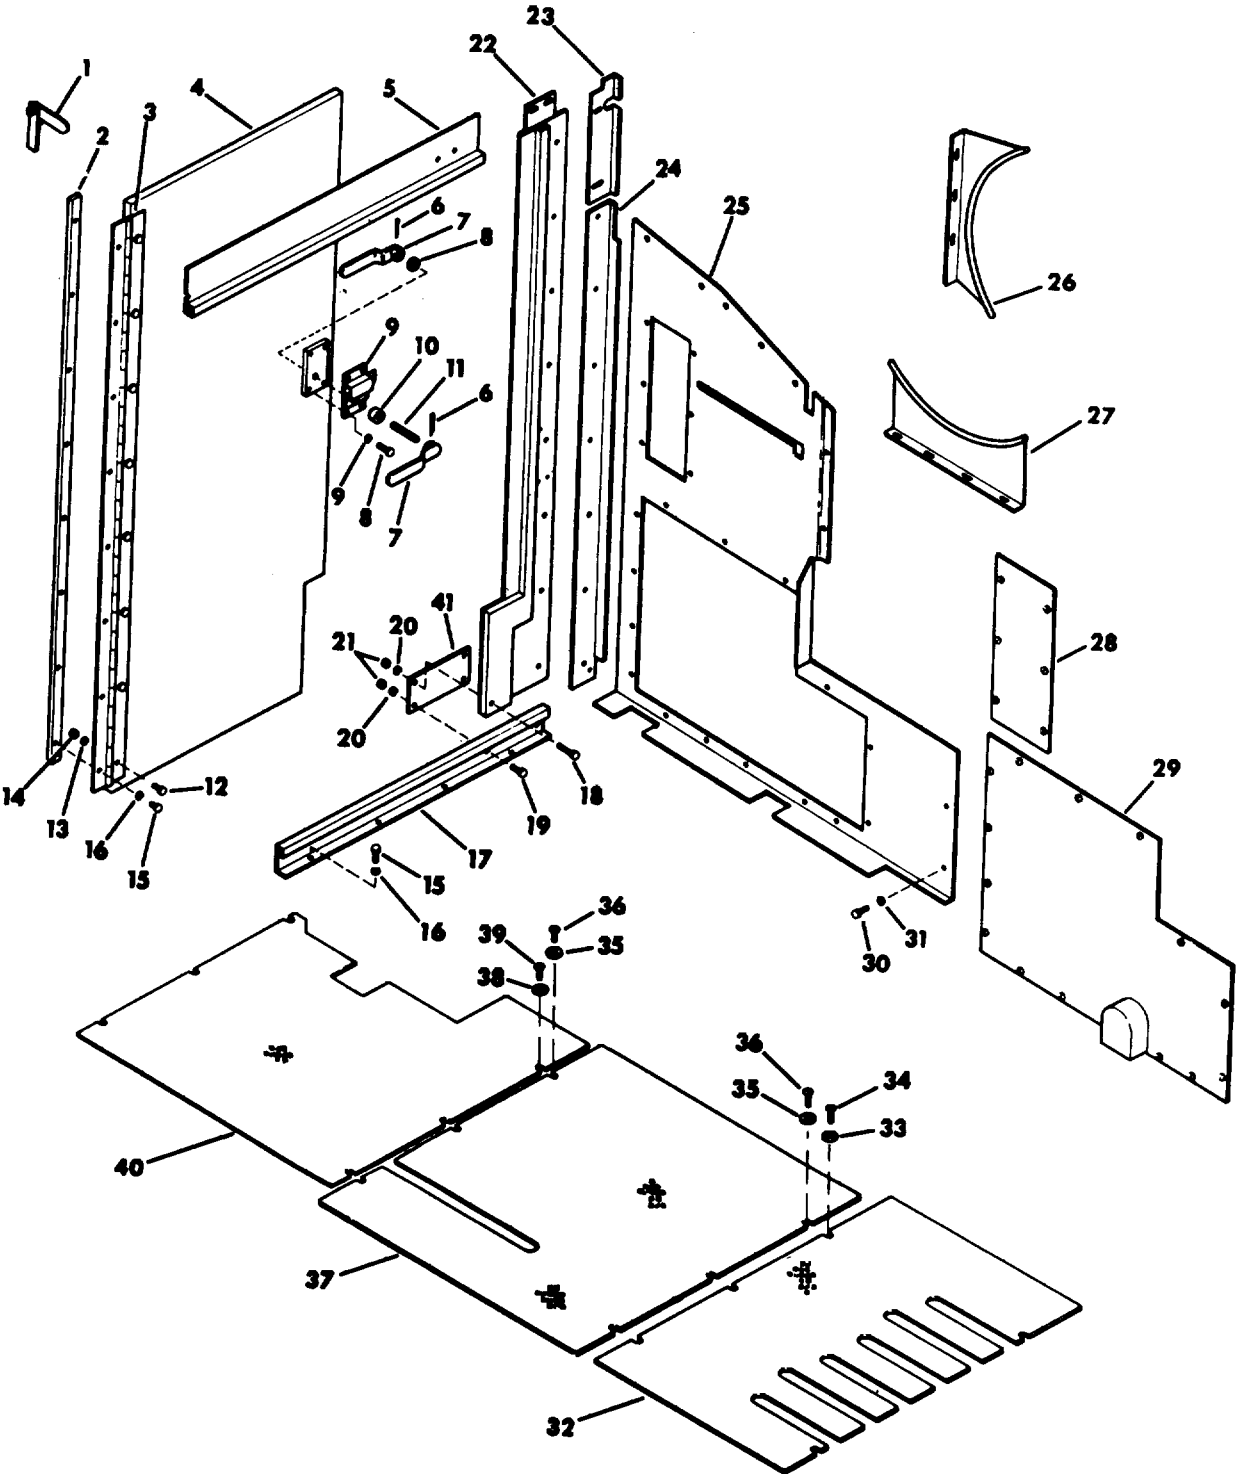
Cab sheet metal, removal and replacement (Sheet 5 of 6)
